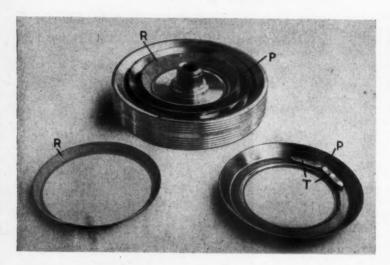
An inner rotor sub-assembly with two pressings that are fitted to form a labyrinth seal. Pressings, as seen at the right, are available without counterweights, or with one or two weights to correct the balance of the assembly
